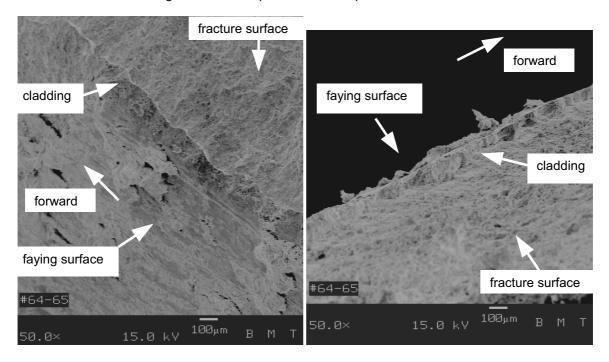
, opposing angle SEM photographs of the fracture segment between Holes 64 and 65 showing the cladding on the faying surface retaining its upward profile from the necking process during ultimate tensile separation without subsequent crack closure.
